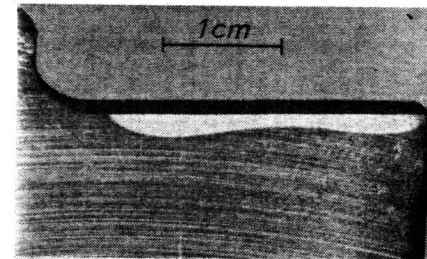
Geometry of the quenched surface on the axial cross section of a pin bearing with cracks
